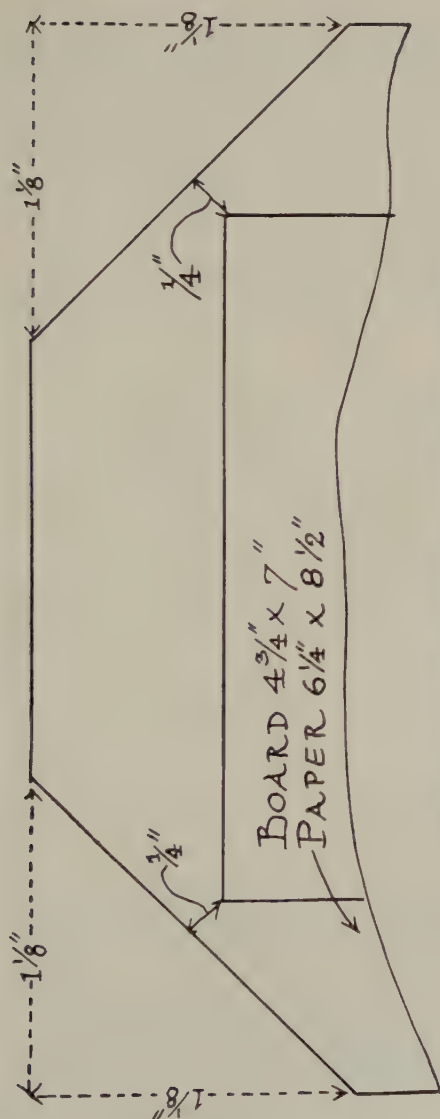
ENLARGED VIEW OF CORNER CUTTING LAYOUT
